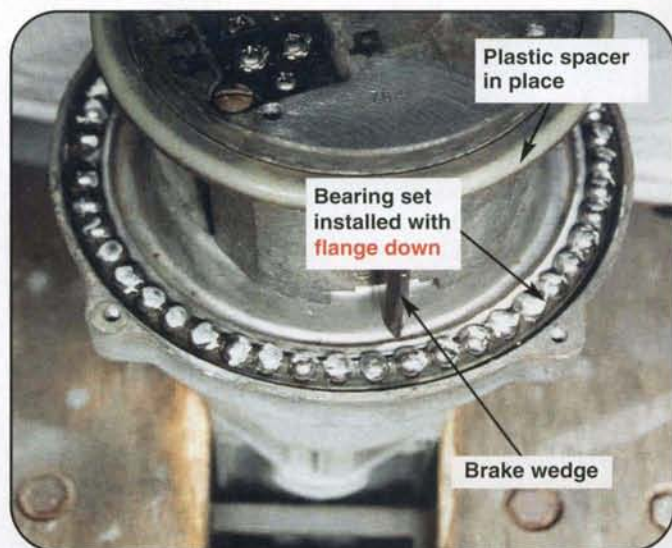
The plastic spacer is in place, the bearing set is installed with the flange down, and the brake wedge is in position (see steps 40, 41, and 42).
